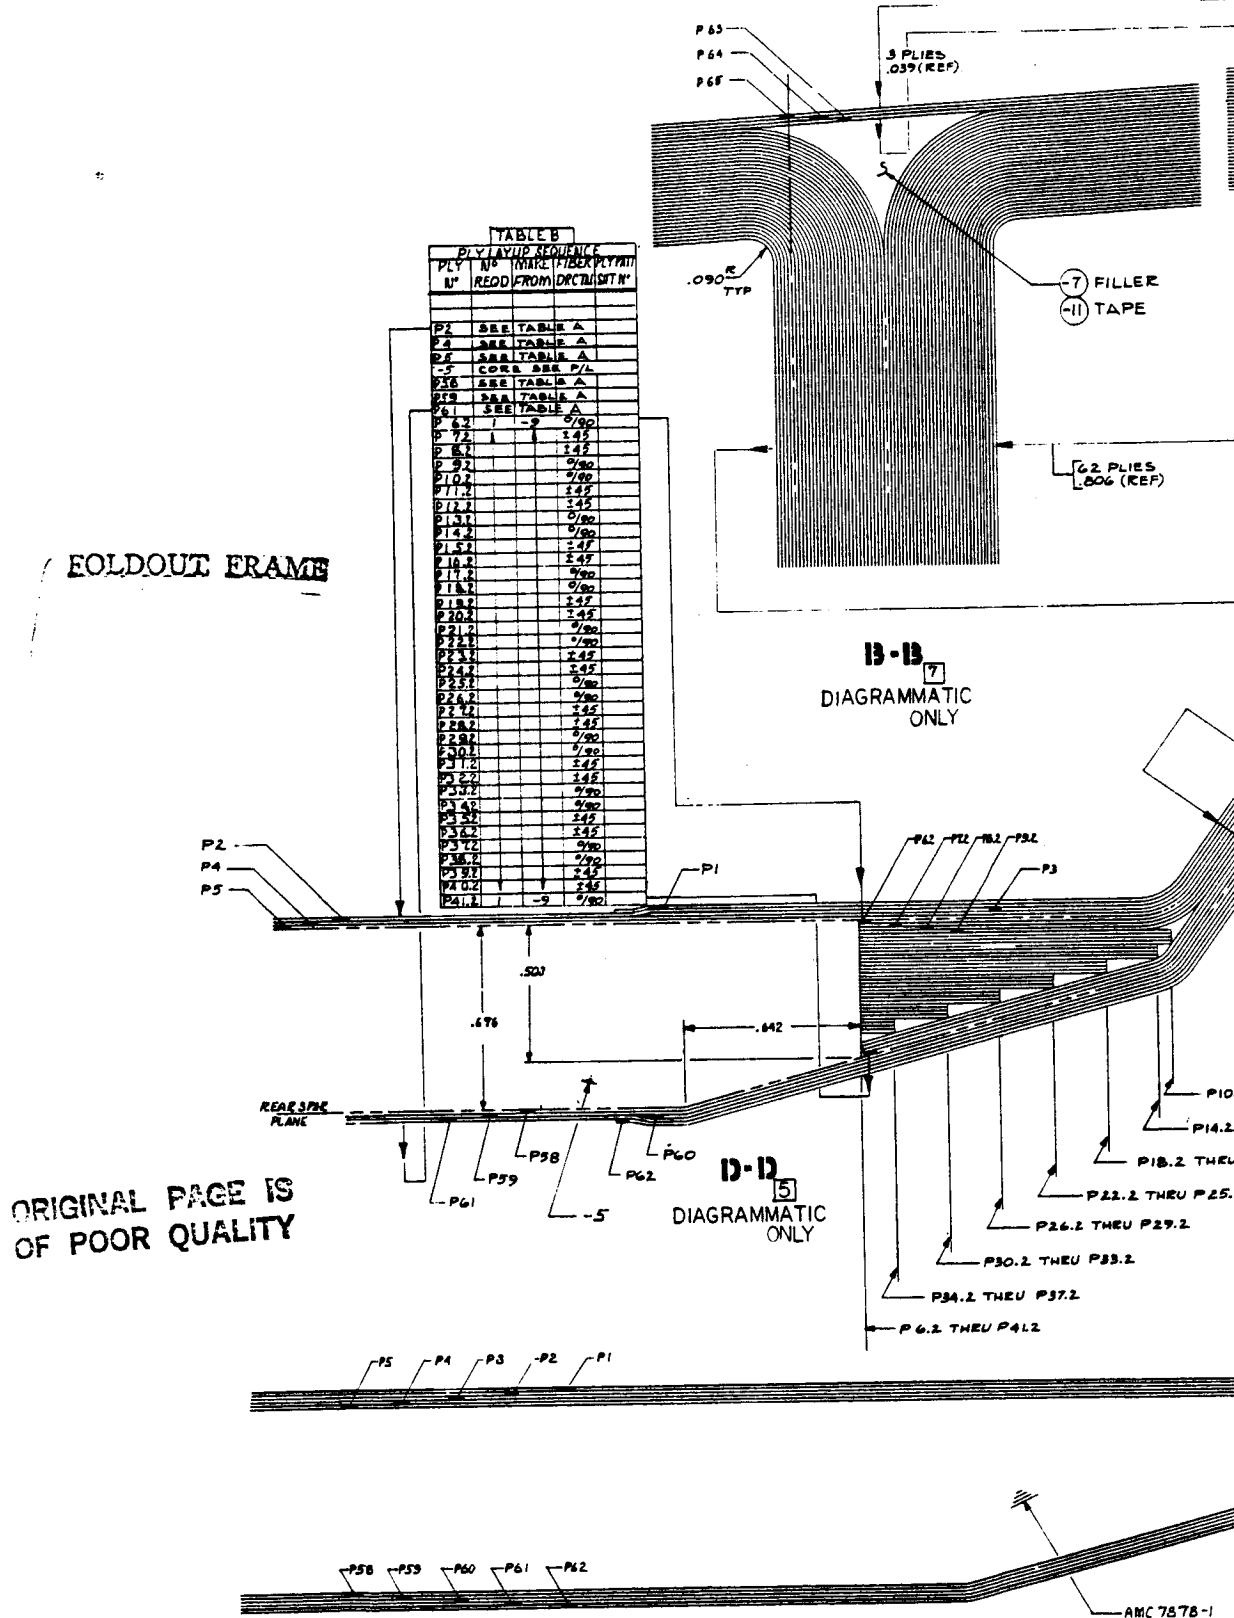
DRAWING AMC7849 - LOWER REAR SPAR ASSEMBLY (SHEET 3 OF 4)
